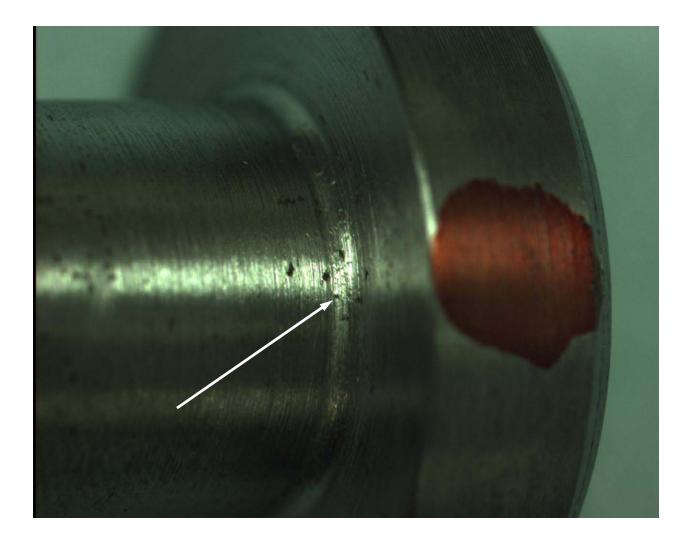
#2 Valve Rod showing ink mark at the approximate location where a PT indication occurred in the machined radius.
